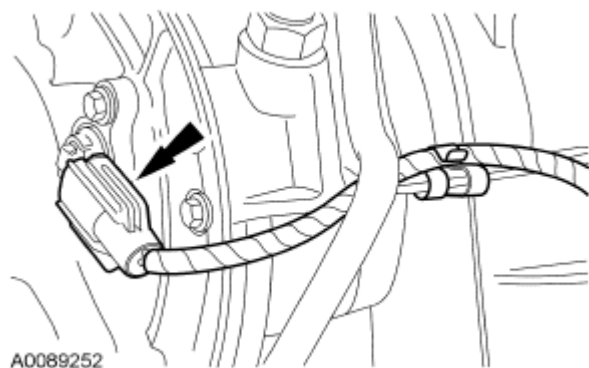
Locating Turbine Speed Sensor (TSS) Electrical Connector
